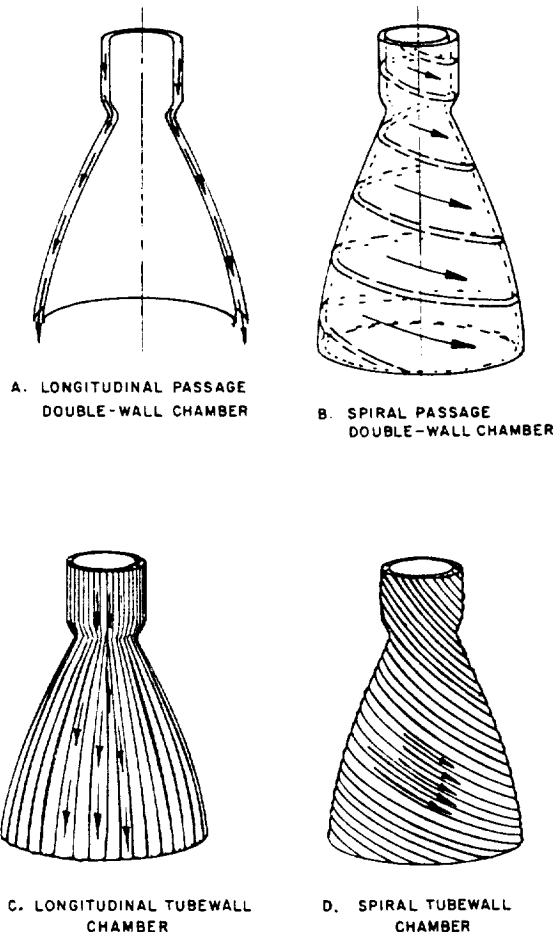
Typical dump-cooled chamber fabrication methods.
